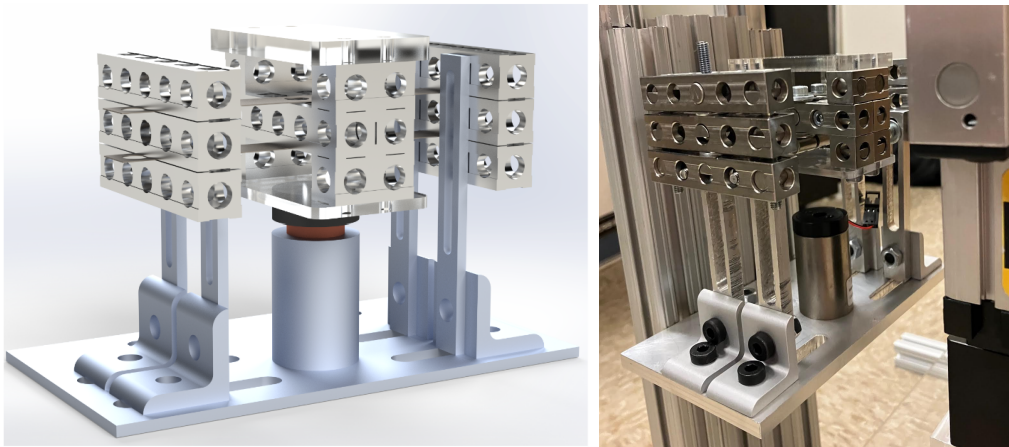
Mechblocks Flexure CAD Model and Prototype.
